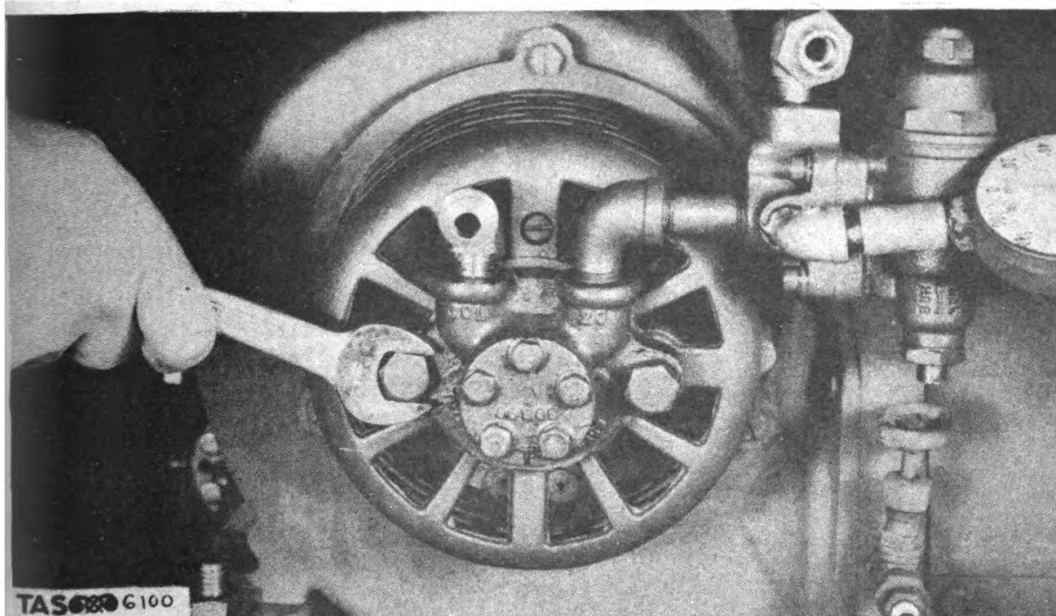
Removing Two Cap Screws Holding Pump Assembly to Rest of Pump and Guard Assembly.
